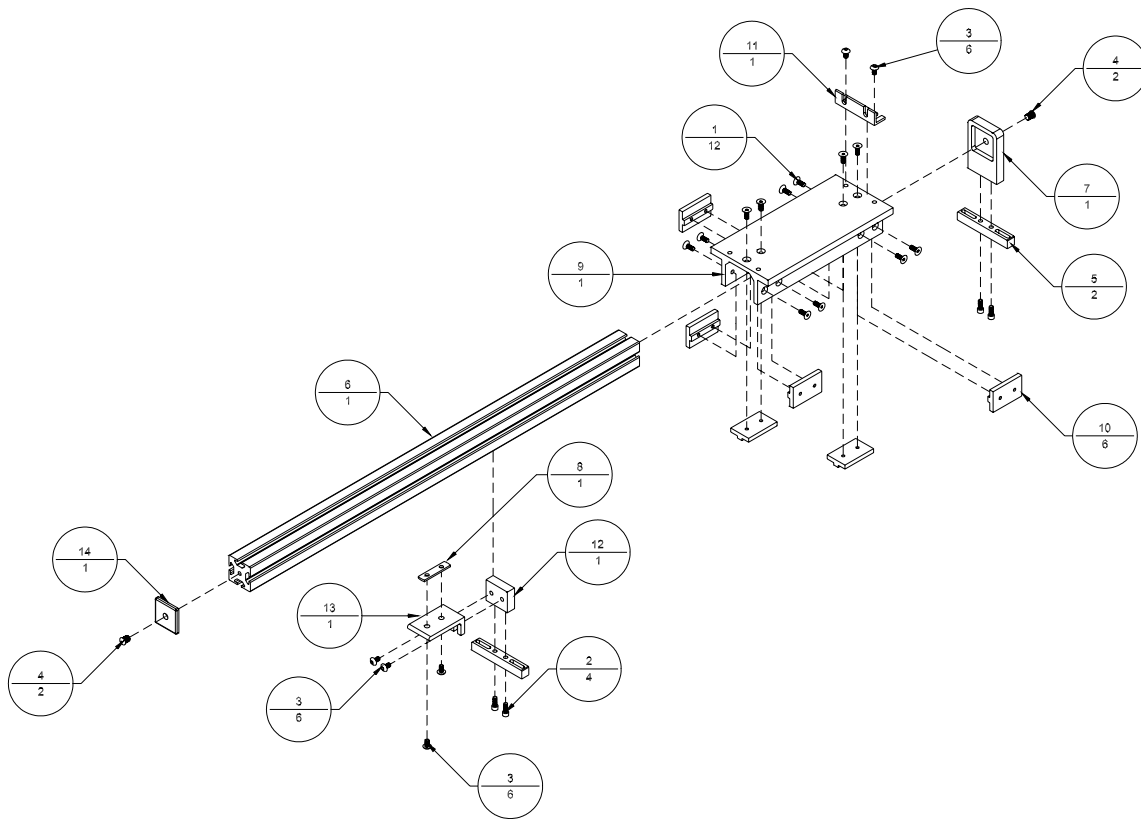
Front Mounting Rail Assembly (9101077A)
